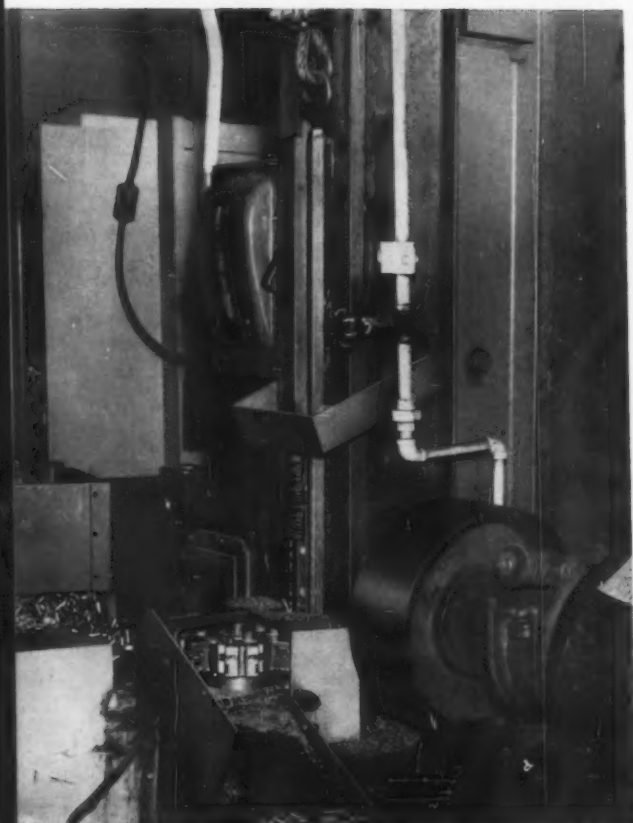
Special automatic broaching machine that cuts key slots of wavy cross-section in brass plugs for cylinder locks. A counterbalanced rack operated by a reversing pinion holds the broach.
